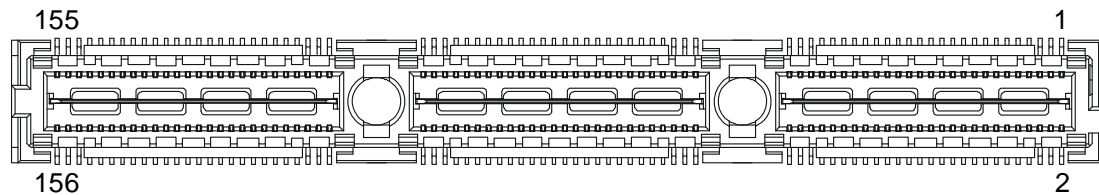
PCIe/104 Bus I/O Connector on Top of Board [J6] – Top View
